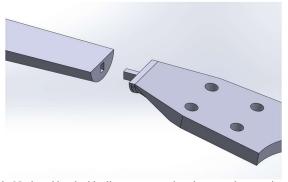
Neck and head with alignment extrusions between the two pieces. Vertical tolerance finalized as 0.35 mm. Horizontal tolerance finalized as 0.45 mm.
